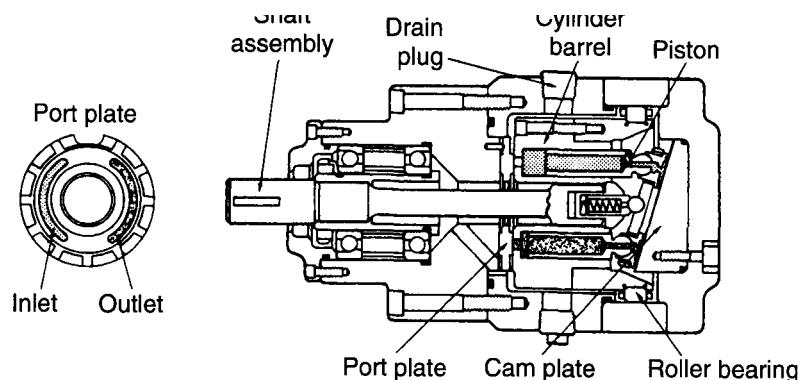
Axial-piston pump. Courtesy Denison Hydraulics.
